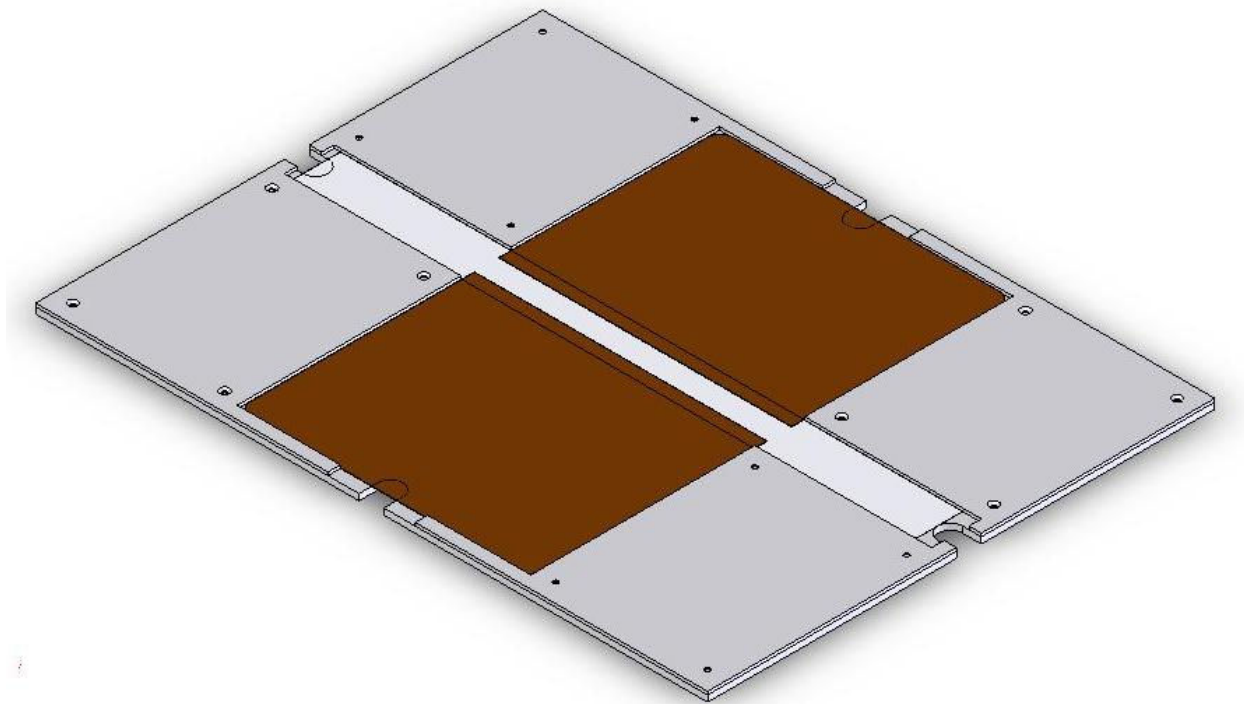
A SolidWorks assembly drawing of the folder assembly fixture showing the tape adhesive side up and the card stock covers in place.
